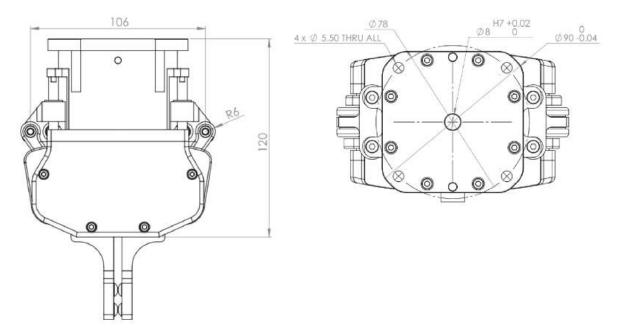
General dimensions of the gripper: Side view (left) and Top view (right)
